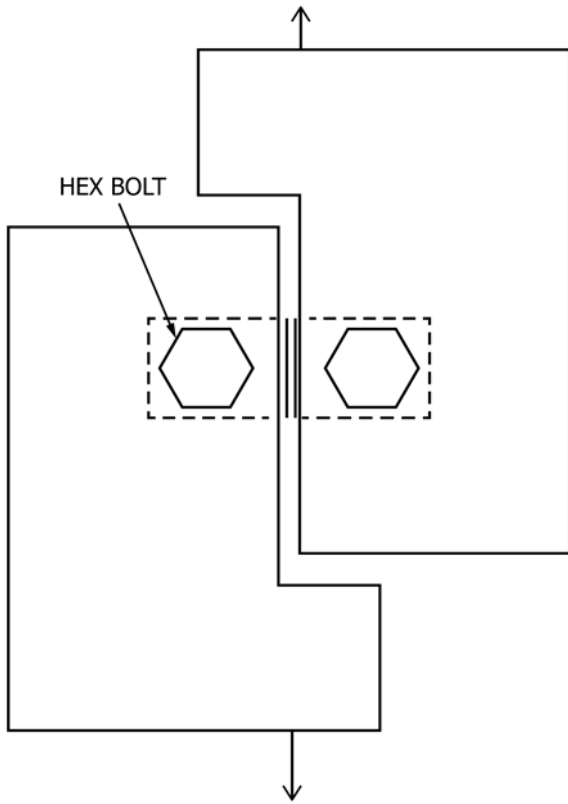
Drawing of the Recommended Shear Test Specimen Assembly
